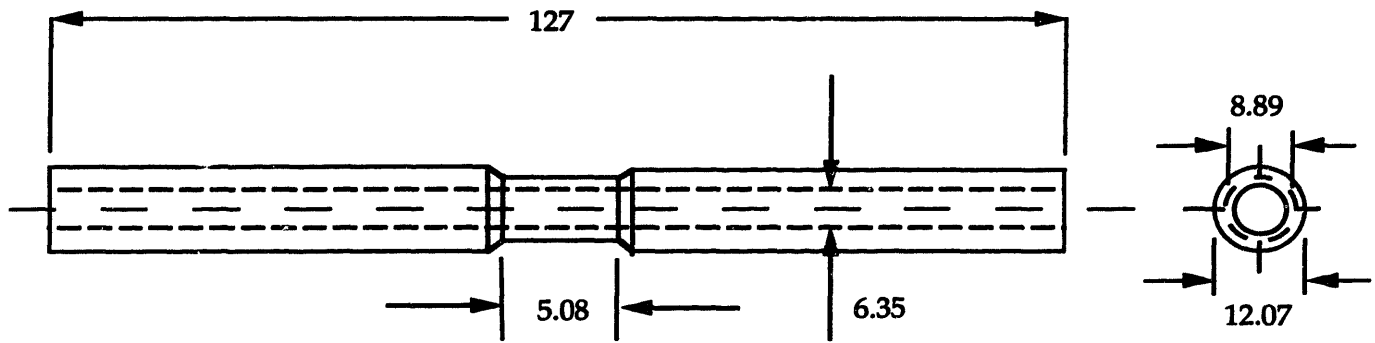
Geometry of tubular-torsion specimen (All dimensions are in millimeters).
